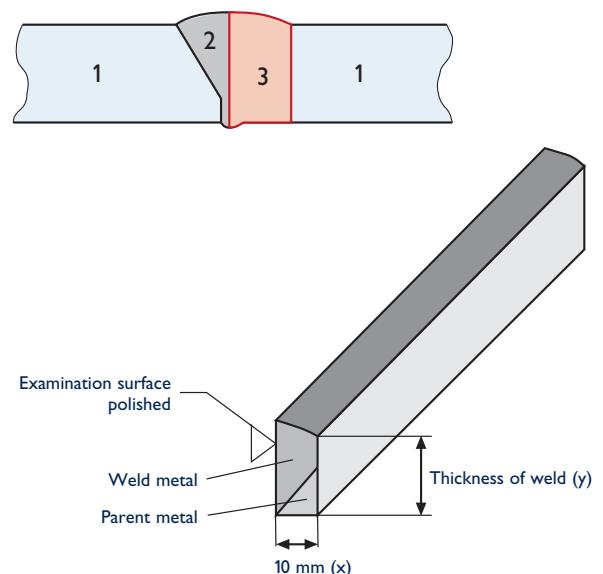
Specimen extricated from the weld joint; 1...Parent metal, 2...Weld seam, 3...Test specimen
